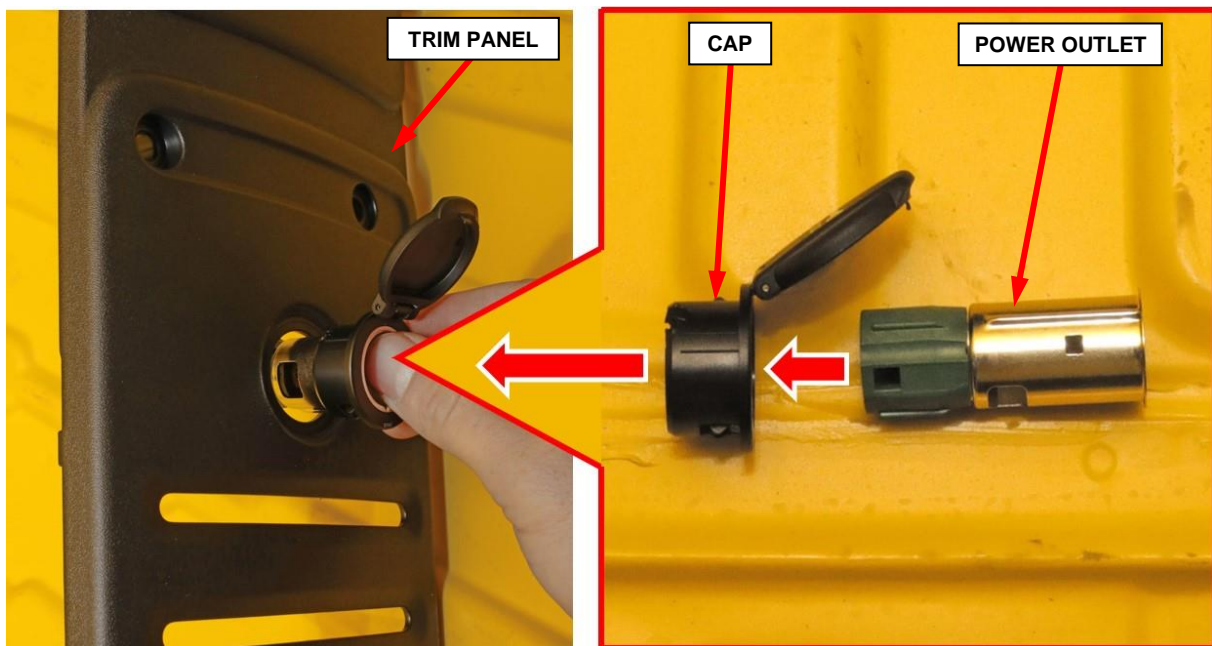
Assemble NEW Parts: Power Outlet and Cap to Trim Panel
